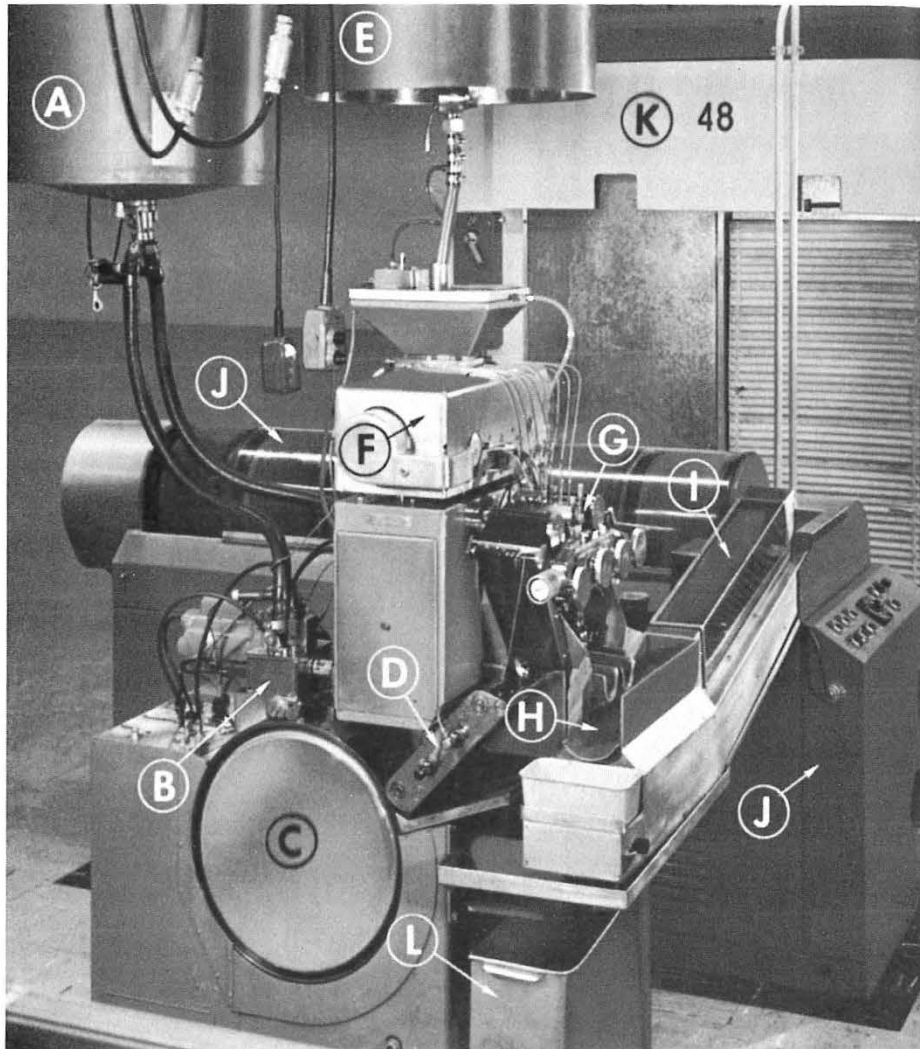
Rotary die process equipment. A, Gelatin tank; B, spreader box; C, gelatin ribbon casting drum; D, mineral oil lubricant bath; E, medicine tank; F, filling pump; G, encapsulating mechanism; H, capsule conveyor; I, capsule washer; J, infrared dryer; K, capsule drying tunnel; L, gelatin net receiver. (Courtesy of R.P. Scherer Corporation.)
